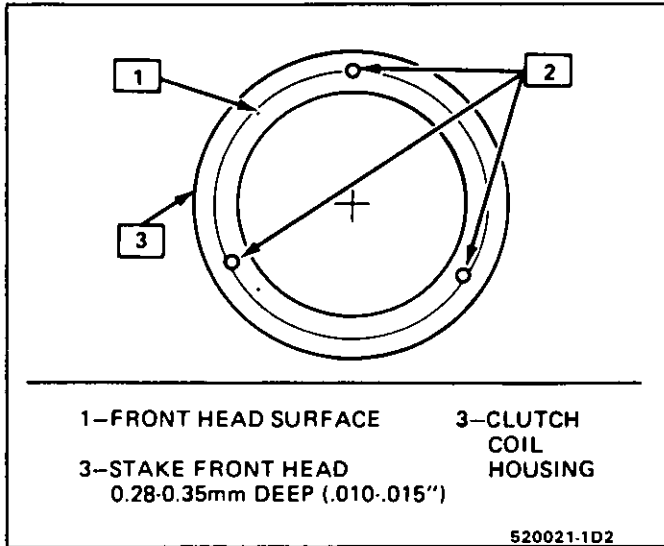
Details of Stakes In Front Head for Clutch Coil
